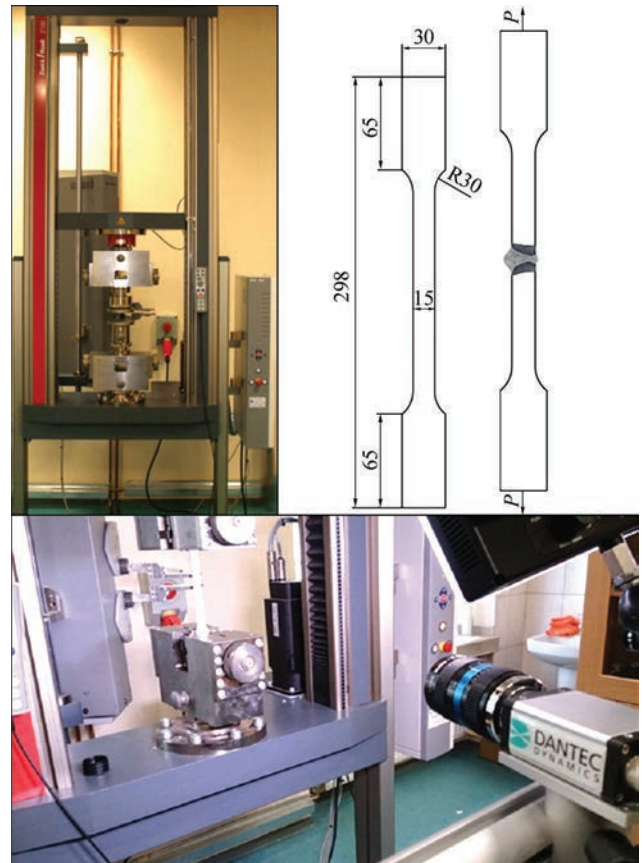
Tension test: universal strength machine Zwick&Roel Z100, dimension of samples used in the test, Q-400 Istra multi-camera 3D
